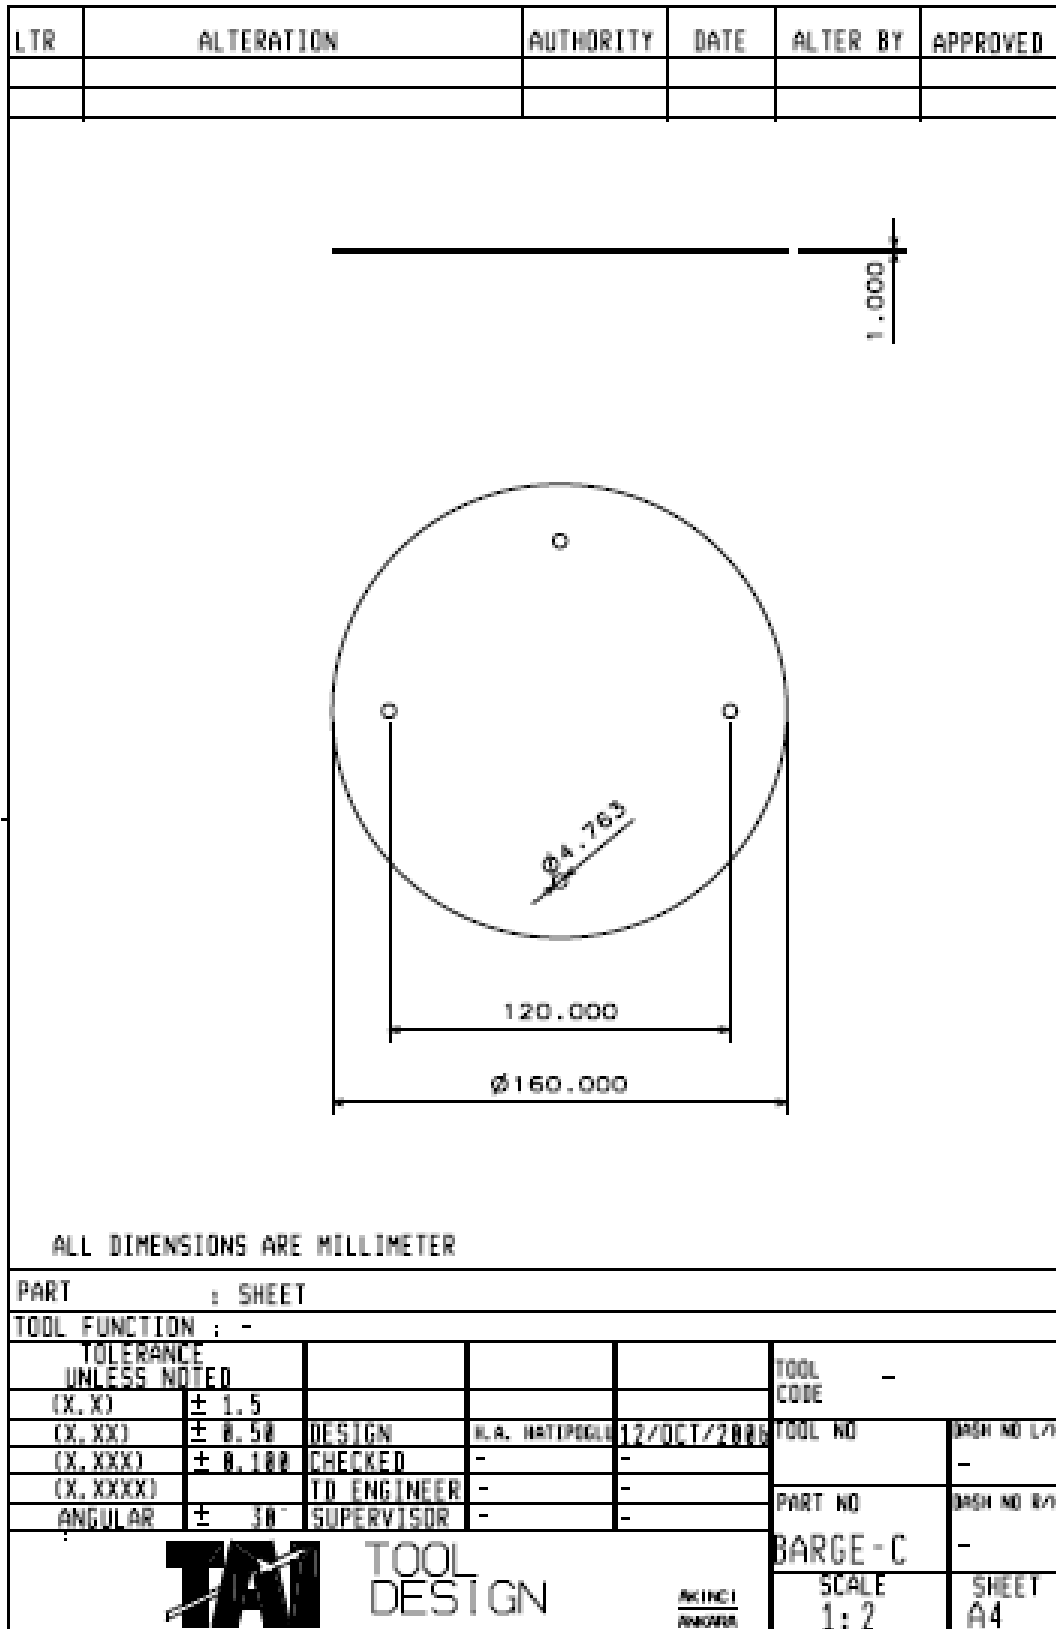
Technical drawing of the blank used in the circular bulging experiment.
